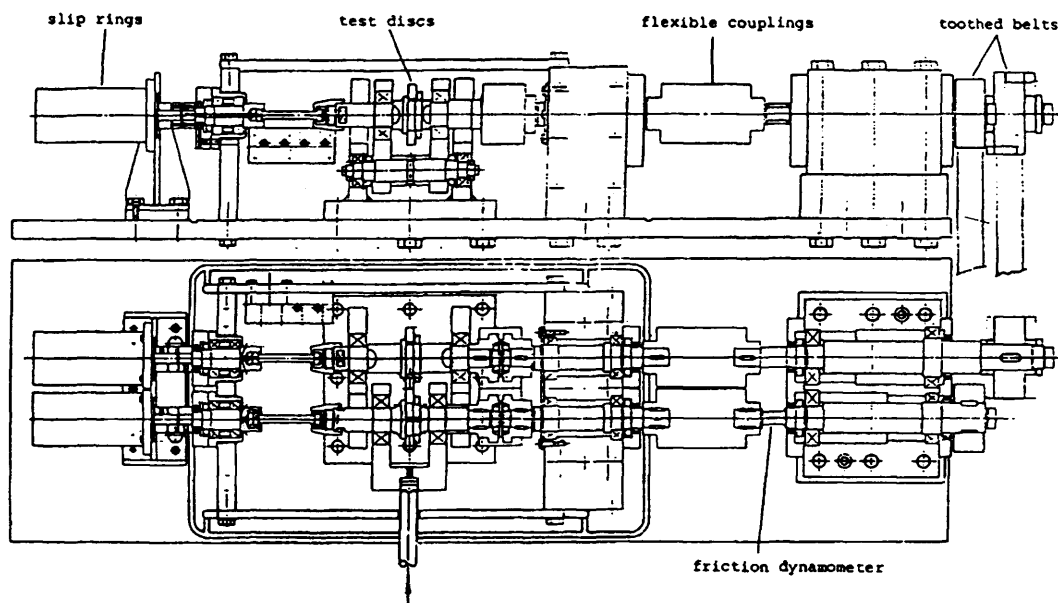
General arrangement of the main parts of the disc machine. Upper drawing shows side view and lower drawing is a plan view. Note slip rings for thermocouple connections on the left and toothed belt drive from splitter gearbox below (not shown) on right.
